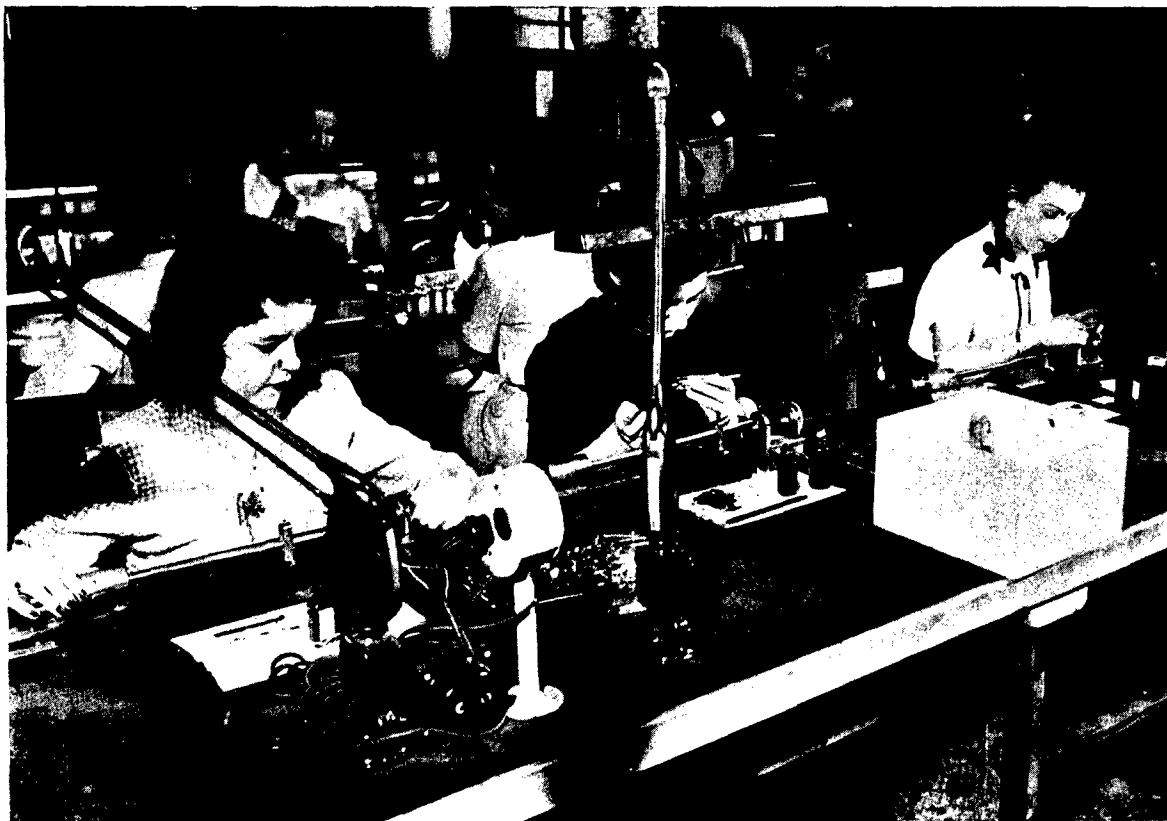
TF cell-ruling fixtures on General Electric assembly line.
